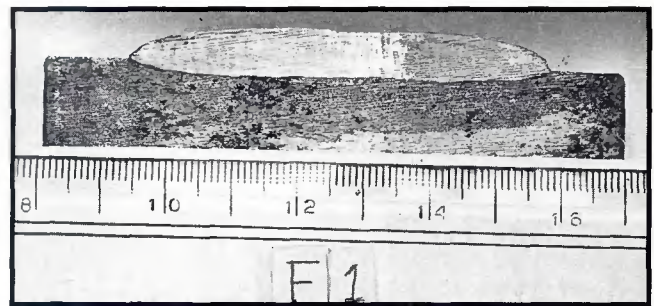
Cross-section of the bead. 1050 A, steered.
